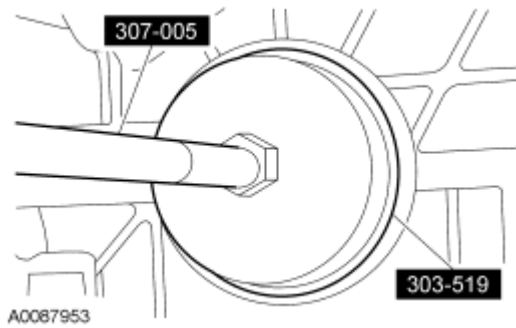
Identifying Special Tools (307-005 And 303-519)
